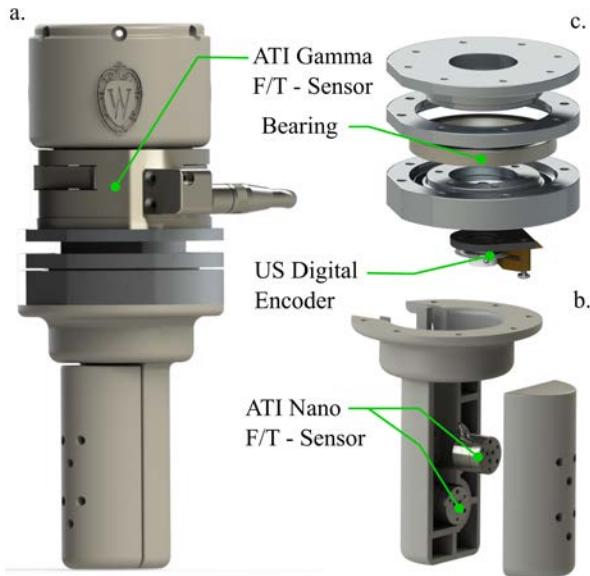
a. End Effector Design. b. Handle. c. Bearing Housing
